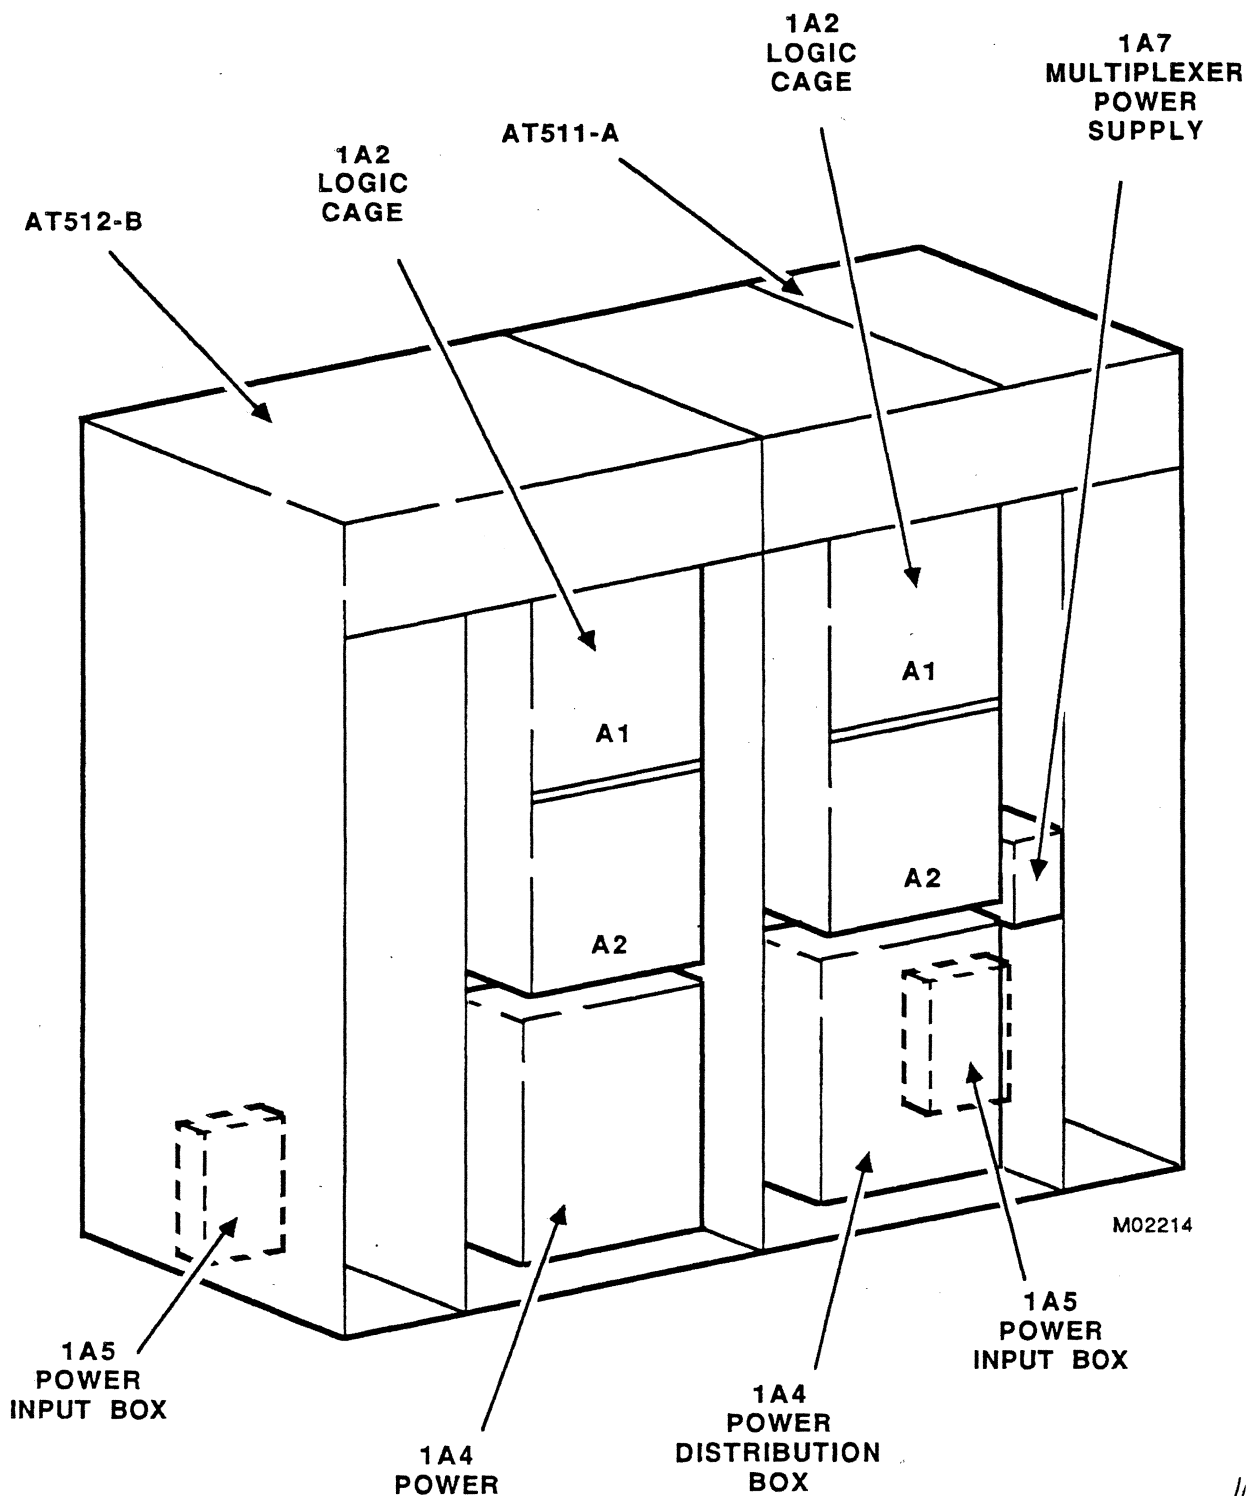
Cabinet Front View, Selected Assembly Locator
